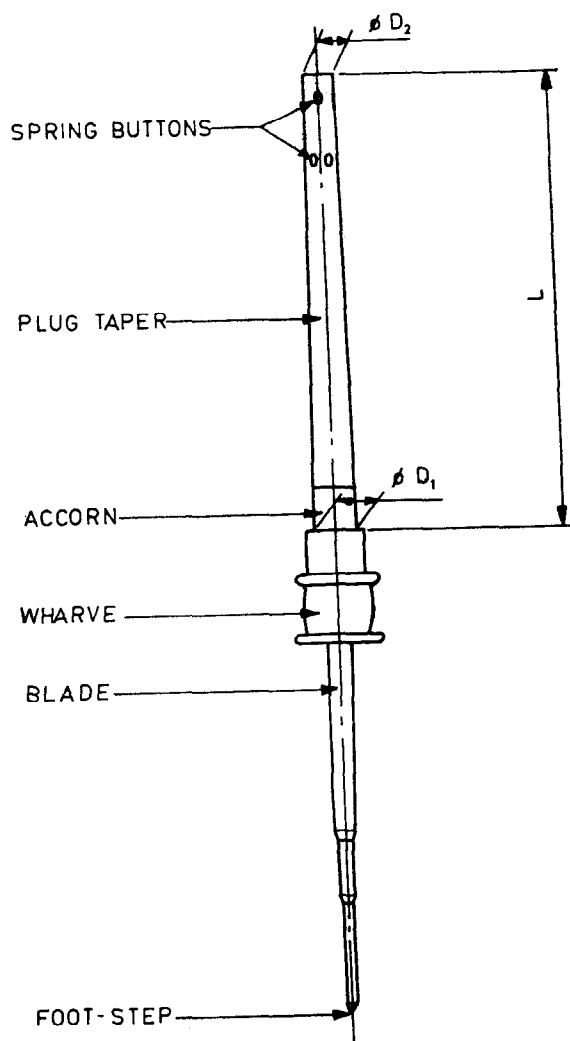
TYPICAL ALUMINIUM PLUG SPINDLE
